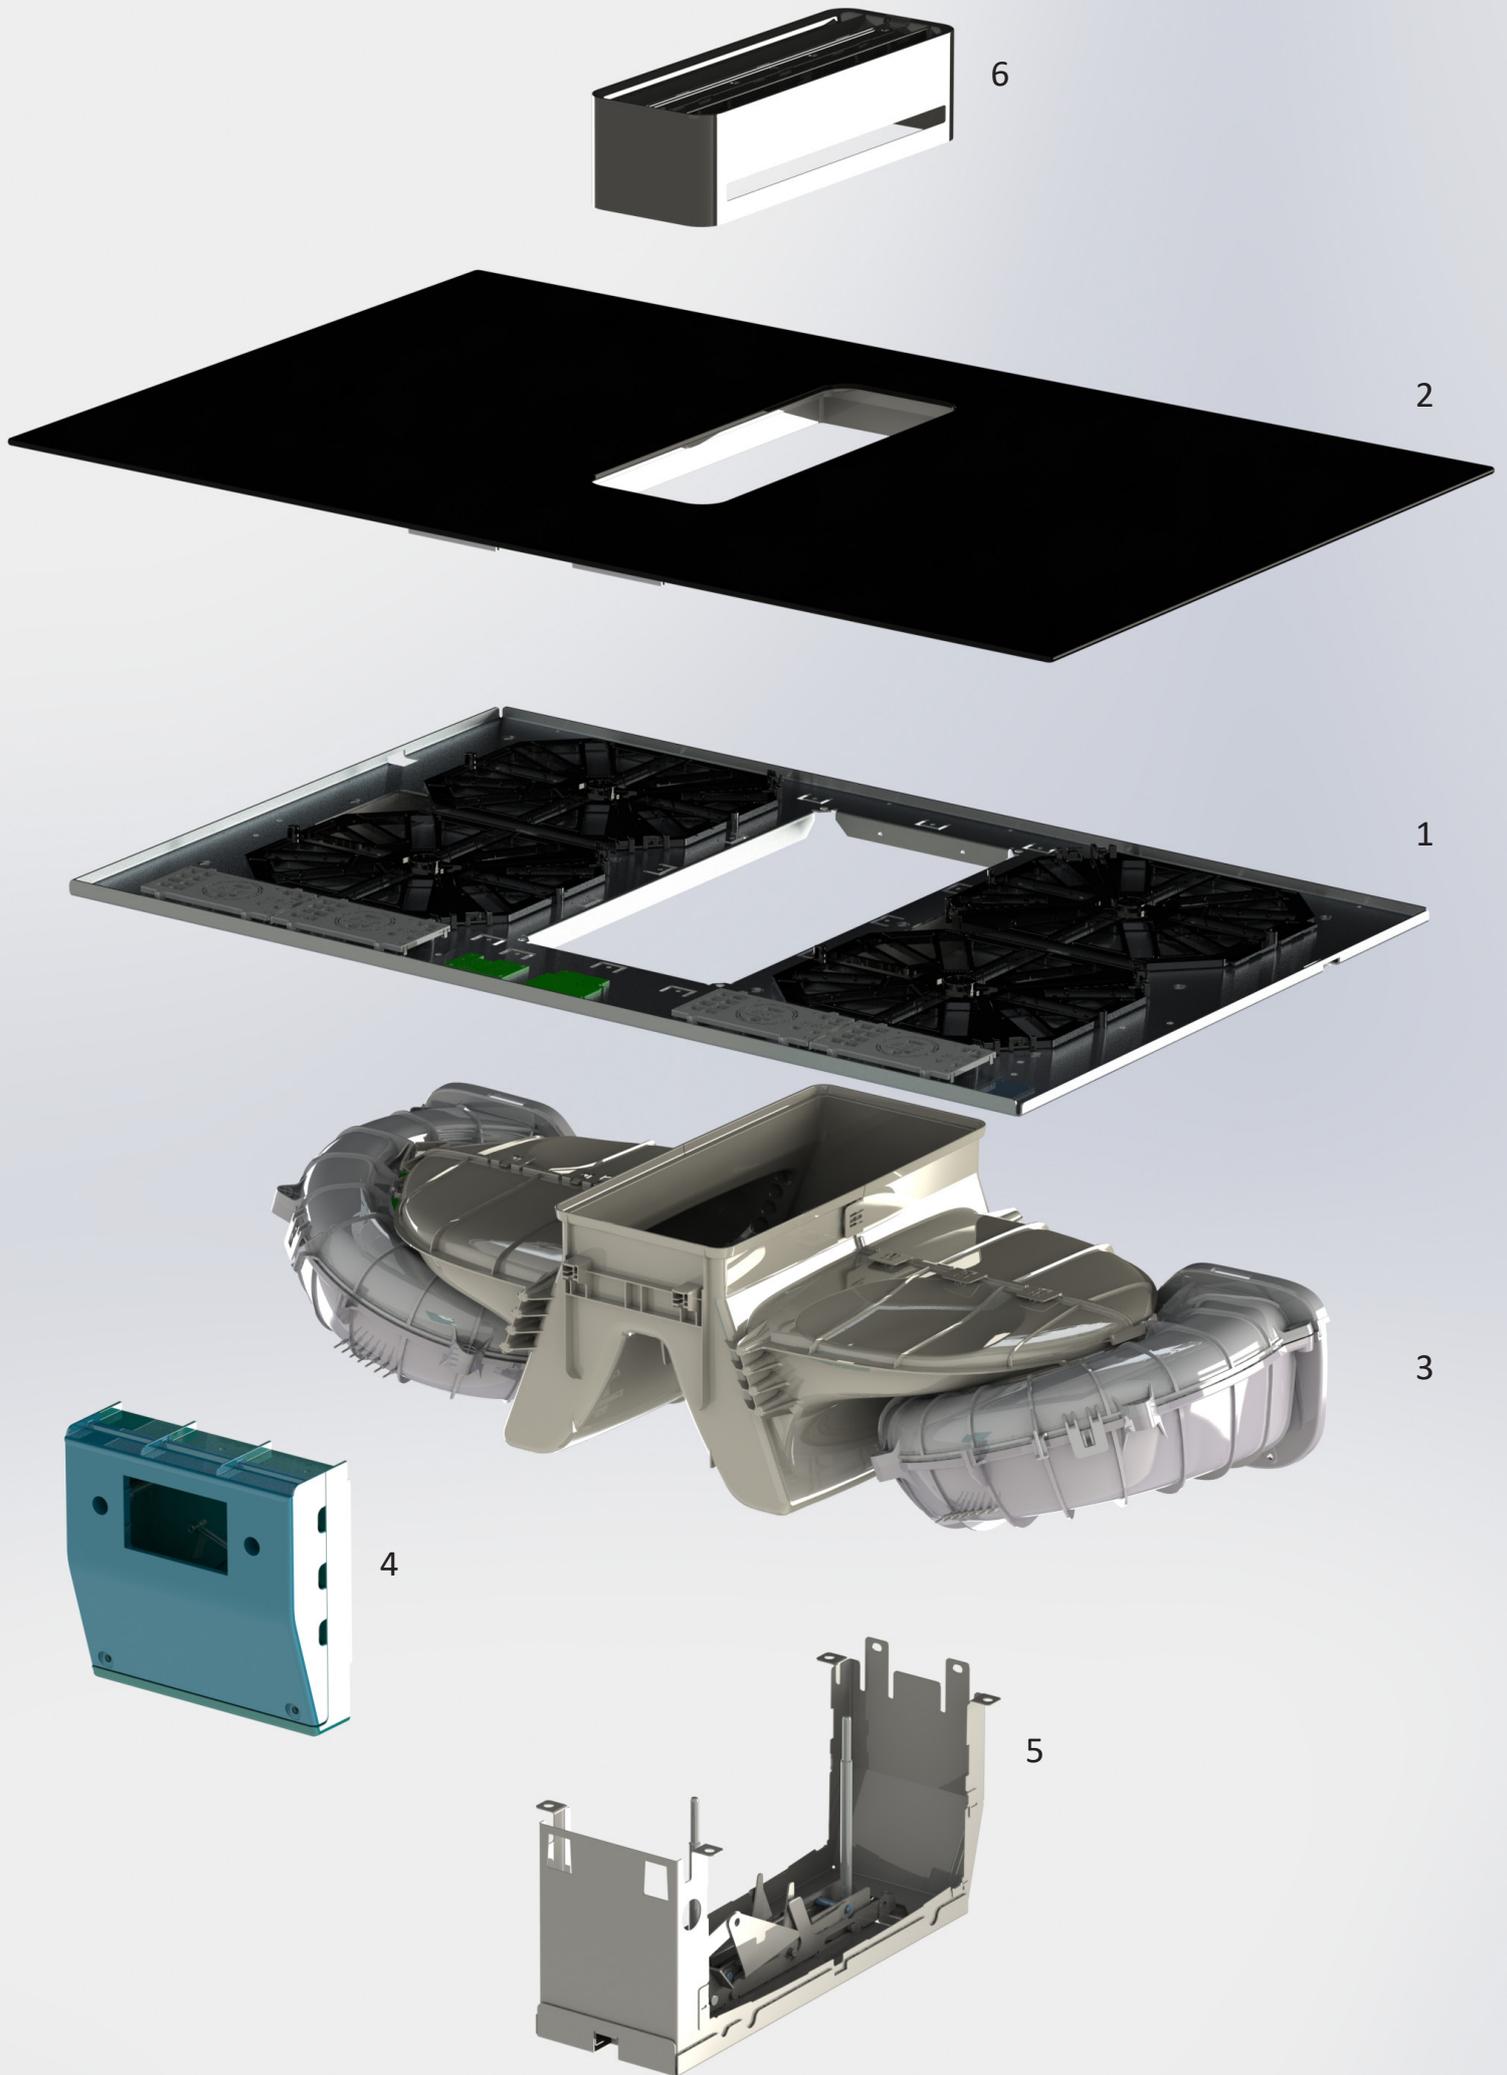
Exploded view assemblies Hood-in-Hob Elevate™
